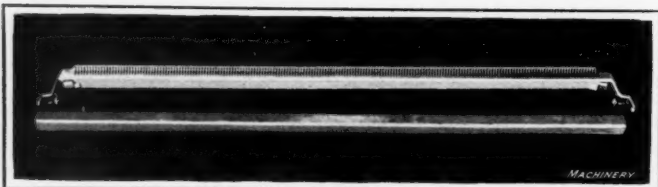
Tube Frame for Carpet Loom and a Length of Tube
